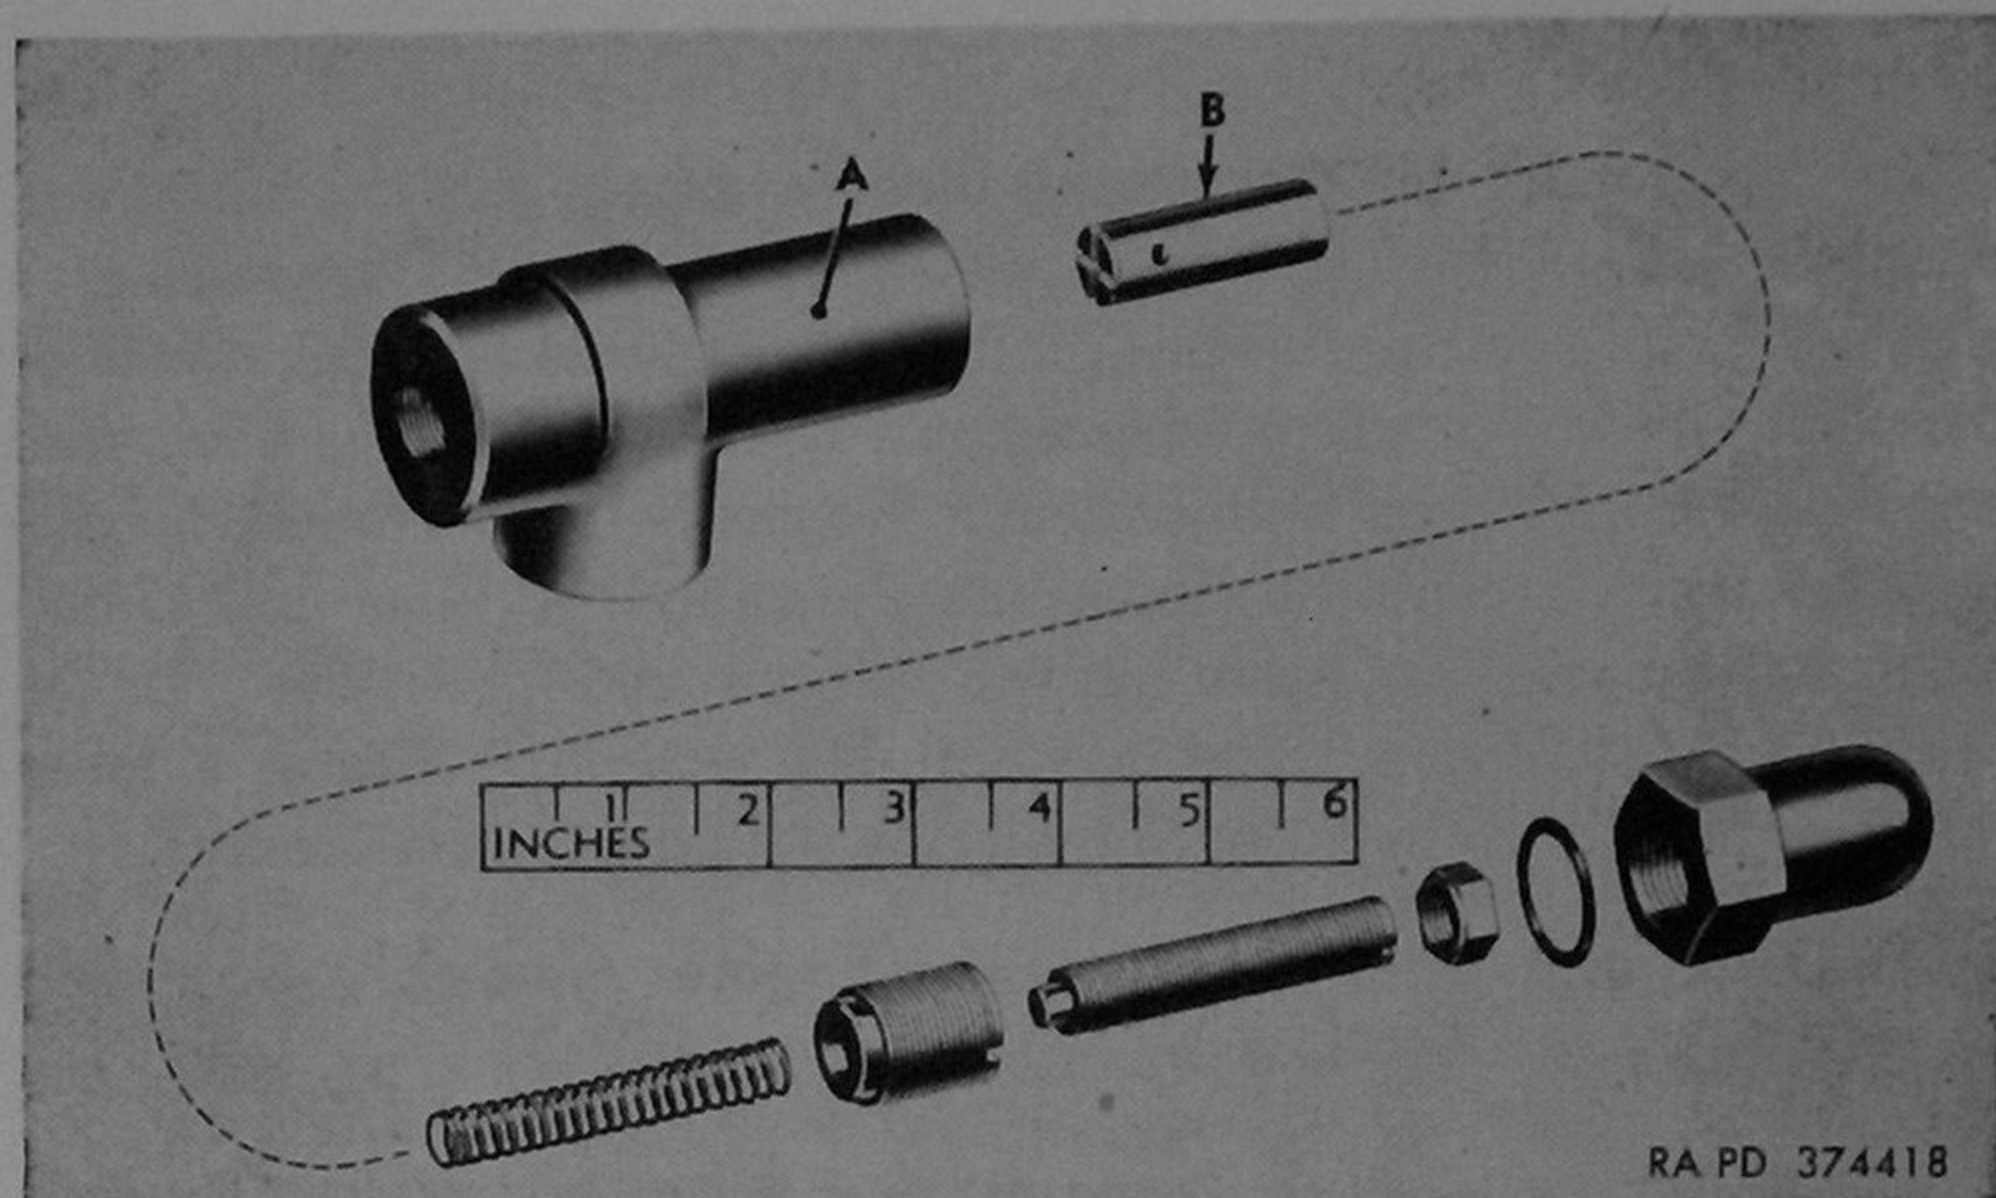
Repair and rebuild standard points of measurement for oil bypass valve (engine assembly—8726920 only).
